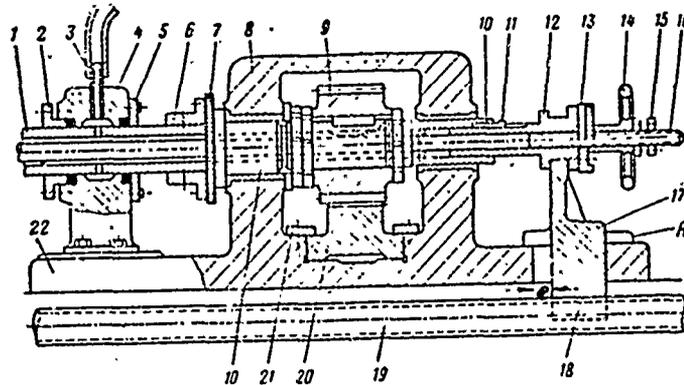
Carriage of rifling machine of the firm Nema (longitudinal cutaway)
